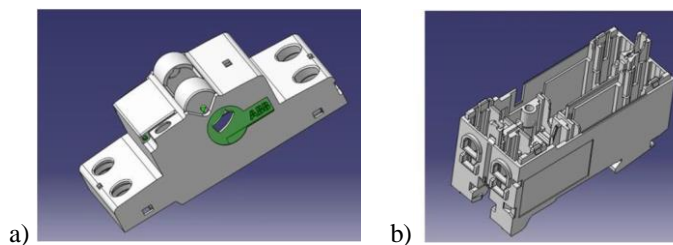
Drawings of the produced parts. a) Cover, b) Housing
